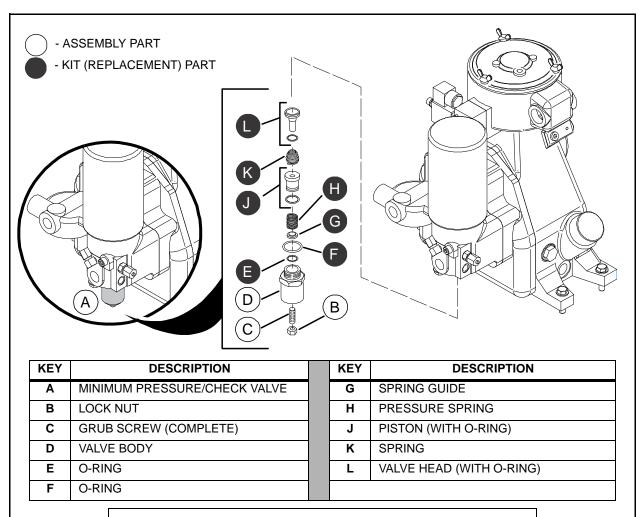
Minimum Pressure / Check Valve Rebuild
